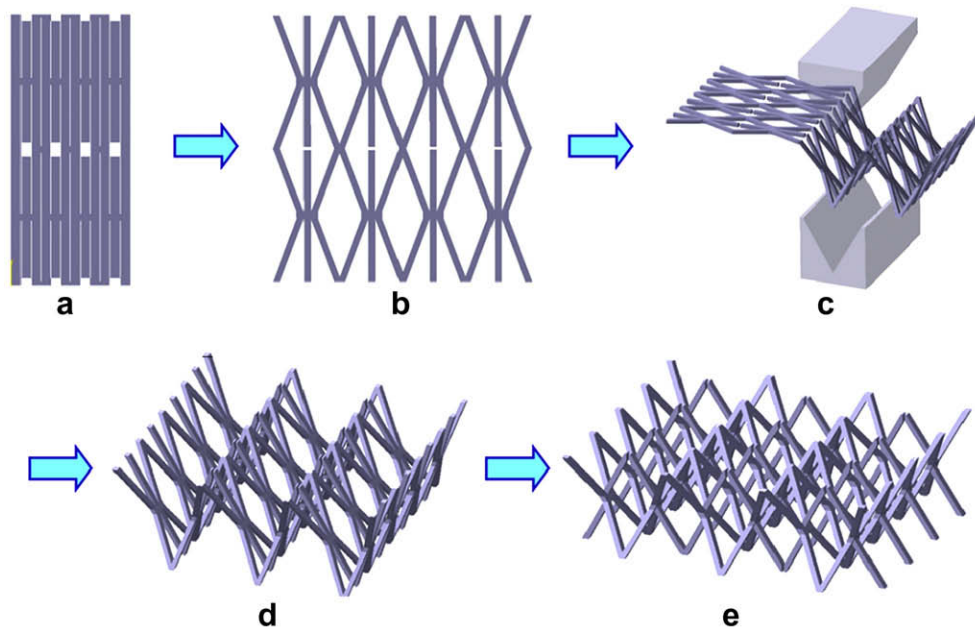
The schematic of specimen fabrication process; (a) a metal sheet with the cuts of unique pattern introduced by using the YAG laser, (b) a metal mesh obtained by expanding width-wise, (c) bending the mesh along the lines connecting the longer ends of the diamond shapes into (d) the corrugated sheet and (e) E&B Kagome shaped core obtained by rotating the shorter strut among each three struts in a shape of bird foot in the corrugated sheet by 120° in the opposite direction.
